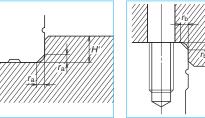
Shoulder for the Fig. 11 Shoulder for the roller rail datum surface slide datum surface
